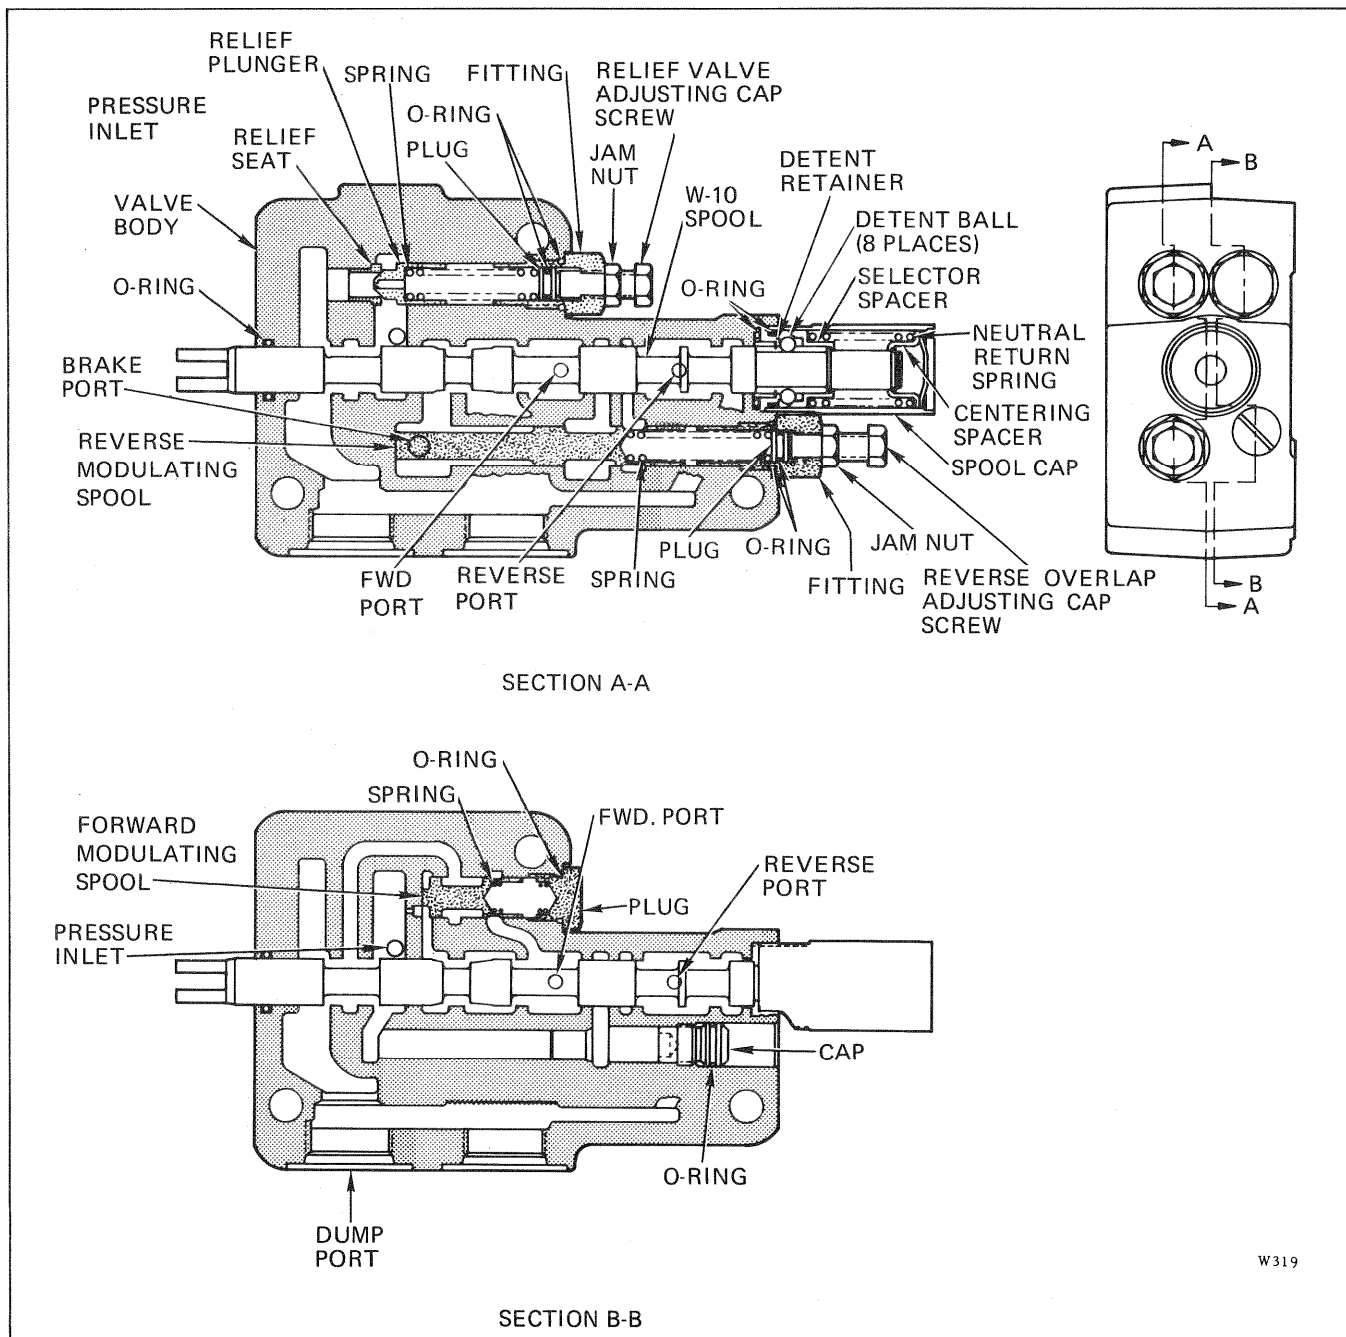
CONTROL VALVE ASSEMBLY, POWER CONTROLLED WINCH
